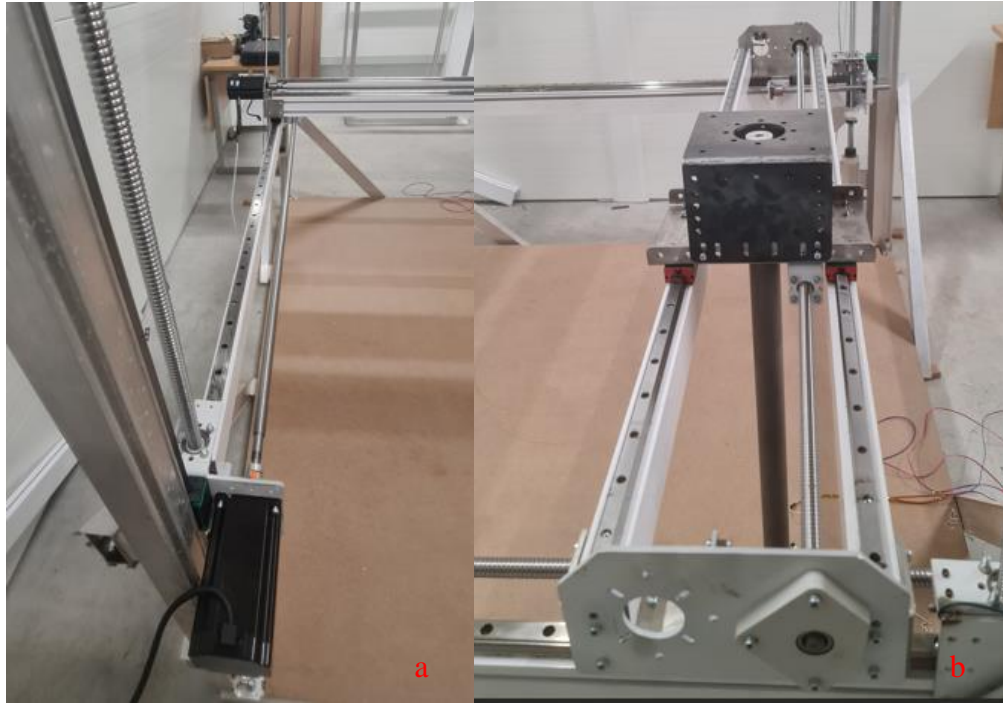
A- Y-axis one side, B- X-axis with mounted extruder
